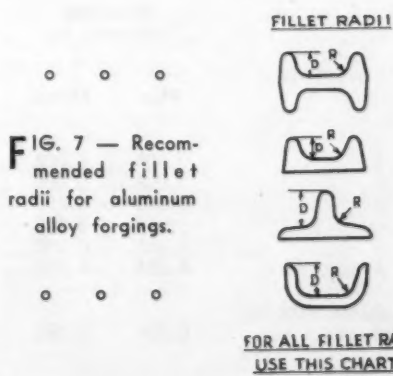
Recommended fillet radii for aluminum alloy forgings.
